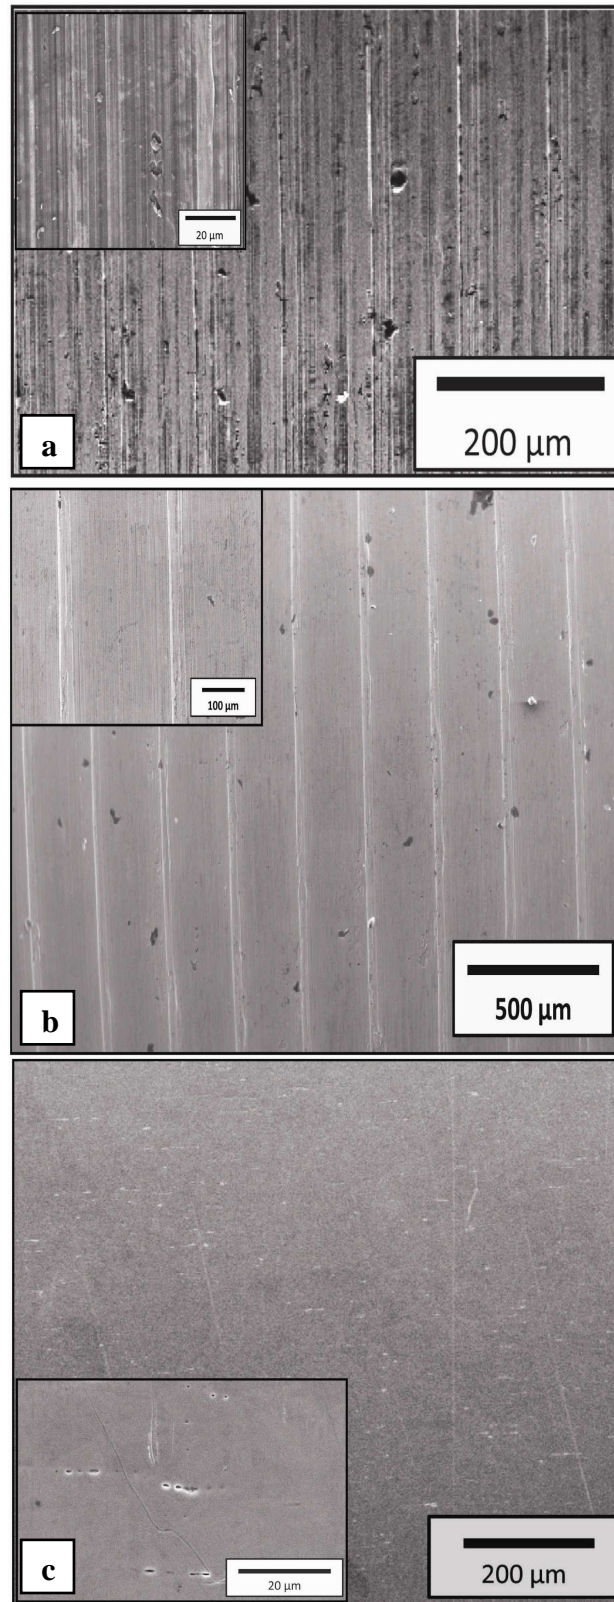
15: Machined surfaces before fatigue test of AISI 304L; a) Fine machined (C); b) Rough Machined (A); c) Electropolished (annealed).
